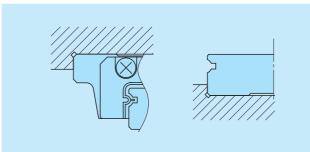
Relieved fillet at the corner of the mating reference mounting surfaces
